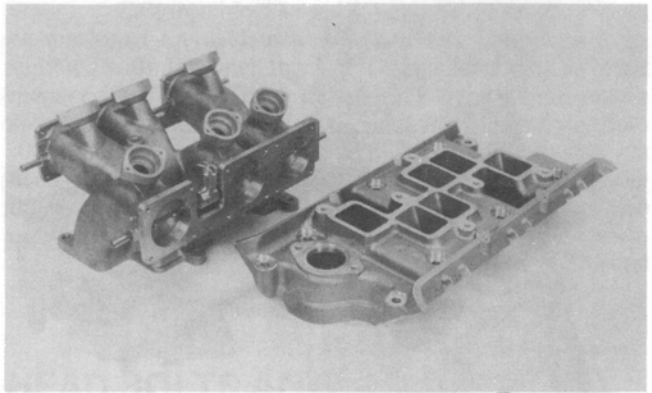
Two-piece electronic fuel injection manifold produces wide torque curve.
